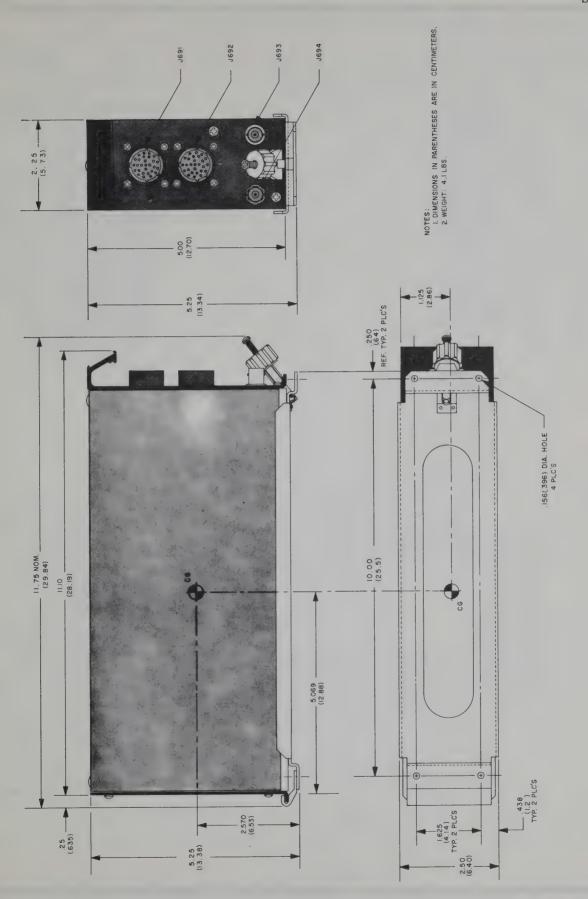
Cessna 800 Glideslope/Marker Beacon Receiver Outline and Mounting Dimensions
